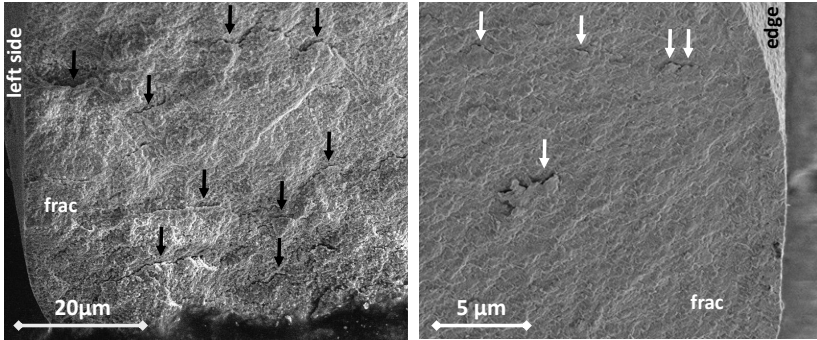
Steps on the fracture surface found in samples from batch F11: (Left) Microcracks running nearly in parallel to the fracture surface into the material form steps on the fracture surface, indicated by black arrows (monotonic test); (Right) A lower density of such steps was found on a fracture surface of another sample ($\sigma_a = 800$ MPa, $N = 1.2 \times 10^3$, $R = 0.2$).
